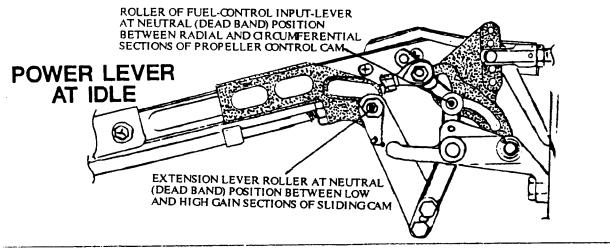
Detail of Control Extension and Cambox Assemblies
